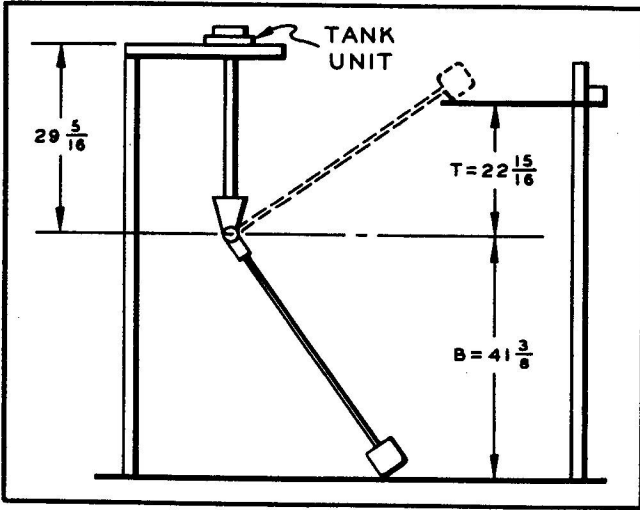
Set-Up Stand Dimensions for EA565P-991
